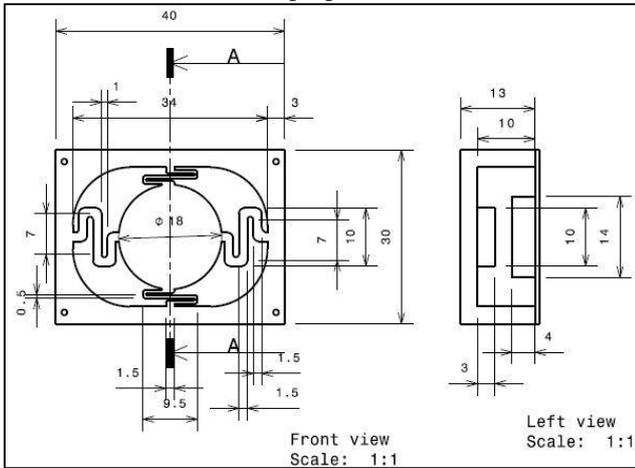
2D drawing of gripper module showing front and left side views. All dimensions are in mm.
